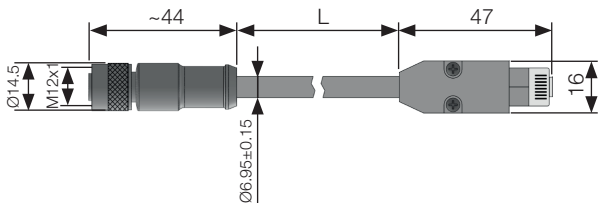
Connection cable with DRIVE-CLiQ/S115 plug, example
